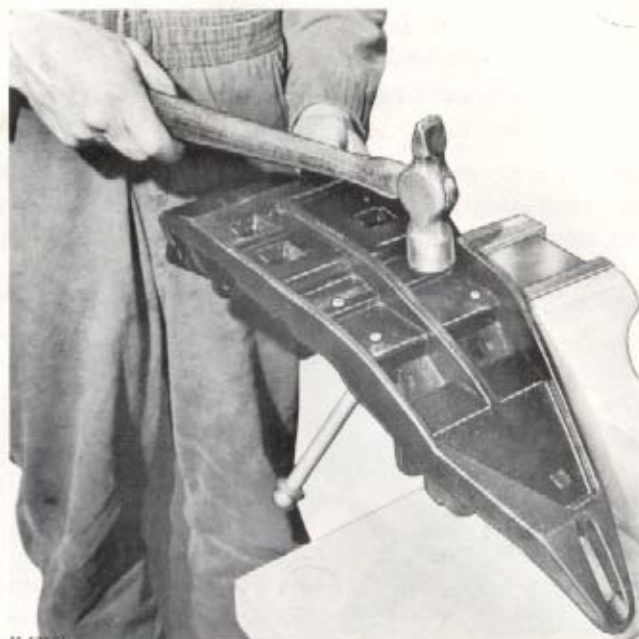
Replacing Ledger Plate On Inner Shoe
